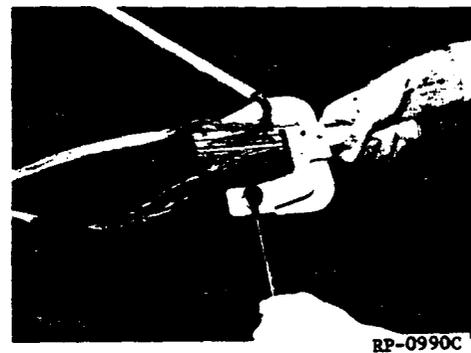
CONNECTING NEW CABLE TO HALF-TAP (PAR. 4.3.2.1, Step 19)
